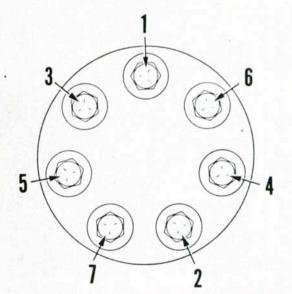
Tighten steering motor end cover retaining cap screws in the sequence shown.
